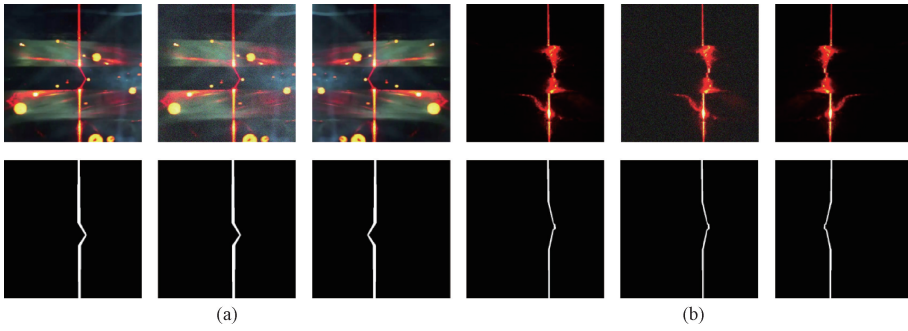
Laser stripe images (top) and their label images (bottom) of some welds: (a) expanded weld with strong noise; (b) expanded weld with strong reflections
